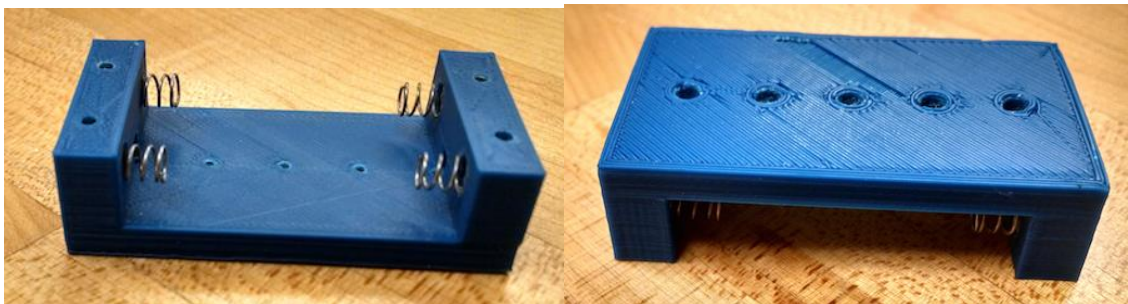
3D printed harvester base v1.4 with springs attached to it
